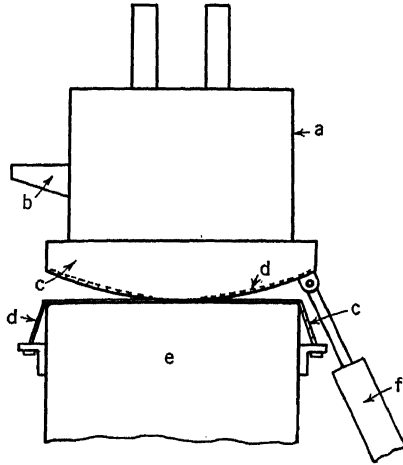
Tilting over steel ropes: *a*, furnace body; *b*, pouring spout; *c*, *d*, steel ropes anchored on opposite sides of foundation; *e*, foundation; *f*, tilting cylinder.
